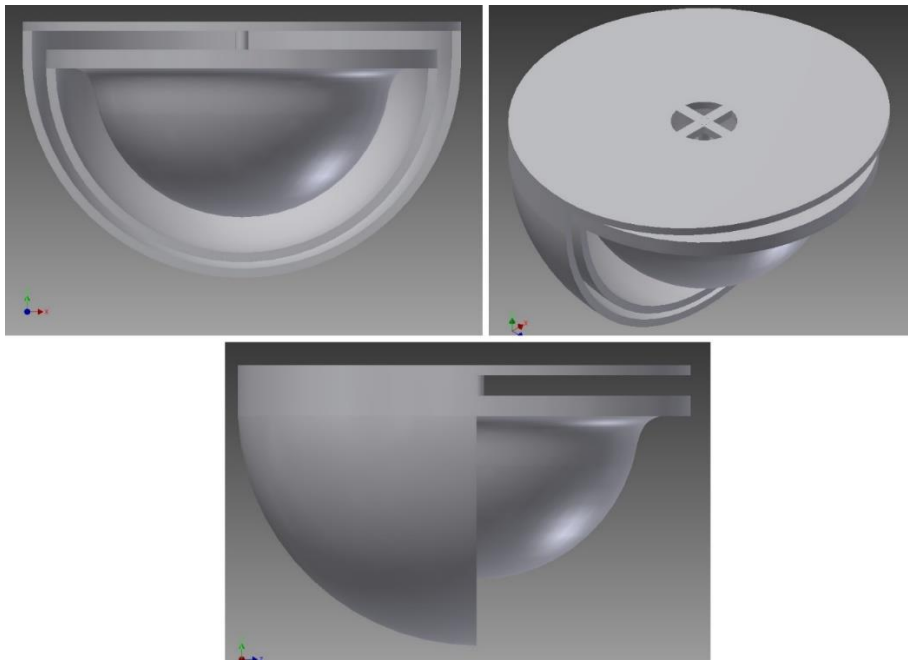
CAD Images of 90° sparger assembly (iteration #1)
